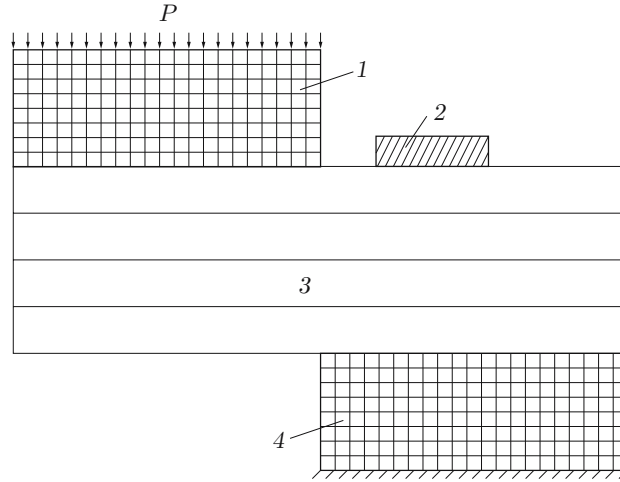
Diagram of loading of a multilayer compact: 1) moving blade; 2) hold-down clamp; 3) assembly of metal plates; 4) fixed blade.
